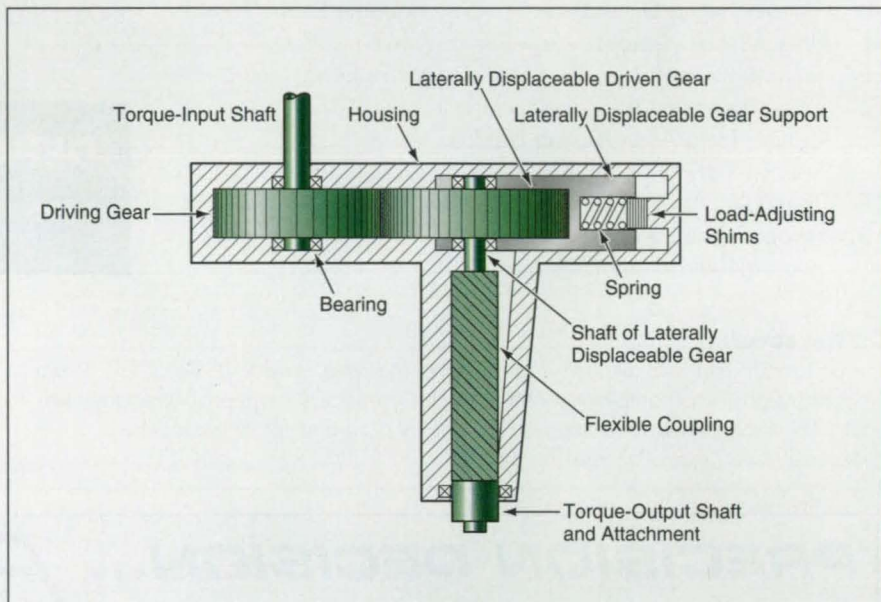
This Torque-Limiting Driver, a predecessor to the present improved driver, would have a displaced-axis configuration that could give rise to a spurious bending moment.
